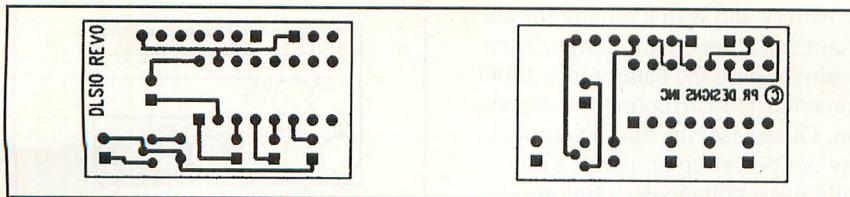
Actual-size etching-and-drilling guides for component (upper) and solder (lower) sides of serial-interface pc board.
